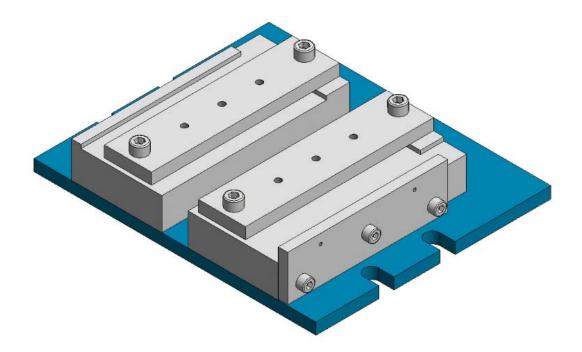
3D view of Jig type fixture for Bobbin FSW
